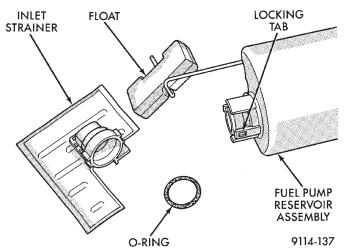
Fuel Pump Inlet Strainer—Front Wheel Drive
